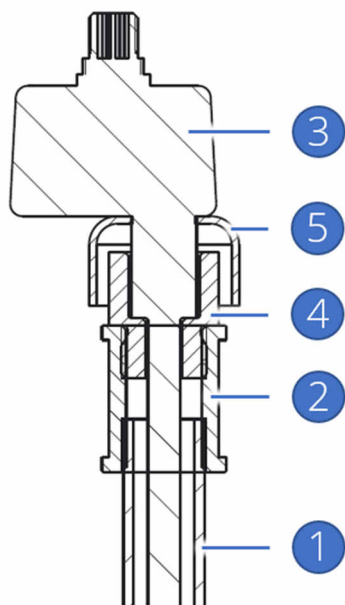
electronical oil dipstick – installation angle 25,6° to 26,9°
